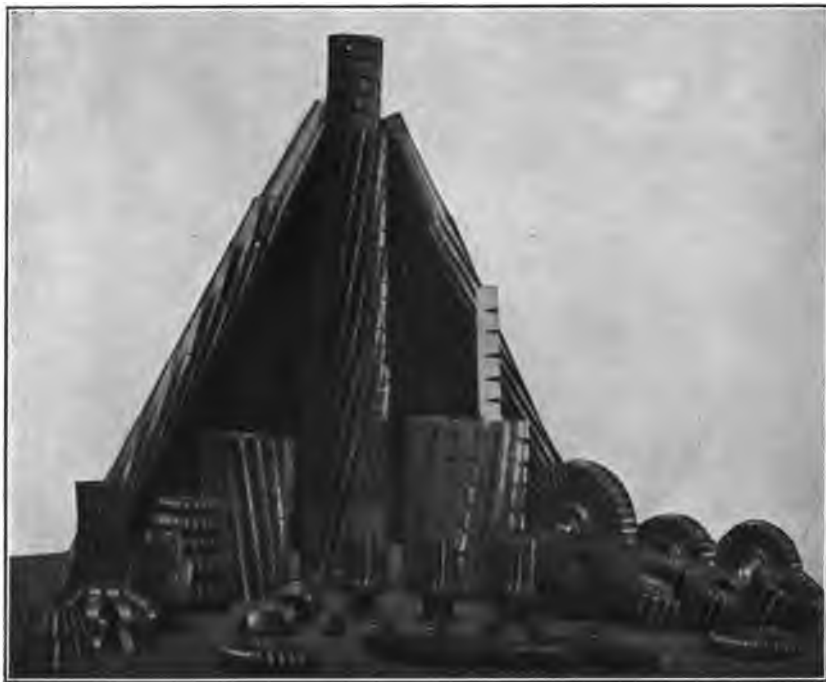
TOOLS PRODUCED IN A WELL-ORGANIZED RAILWAY SHOP TOOL-ROOM. THESE TOOLS WERE ALL MADE FROM THE BEST DESIGNS AND MORE ECONOMICALLY THAN THEY COULD HAVE BEEN PURCHASED. THE SIX-INCH SCALE SHOWN IN RIGHT CENTER INDICATES THE SIZE OF THE CUTTERS.
